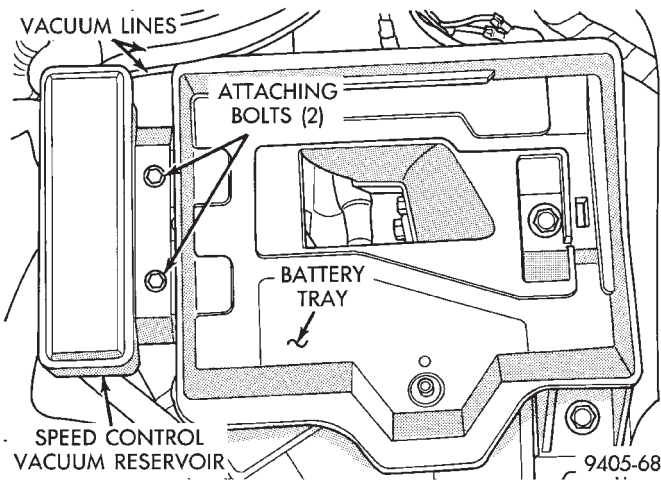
Battery Tray Installation And Attaching Bolts
